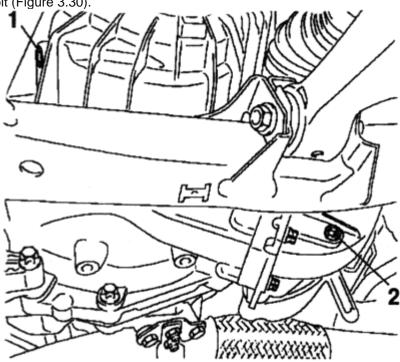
Drain powerpack oils: 1 - control bolt; 2 - bolt to drain
